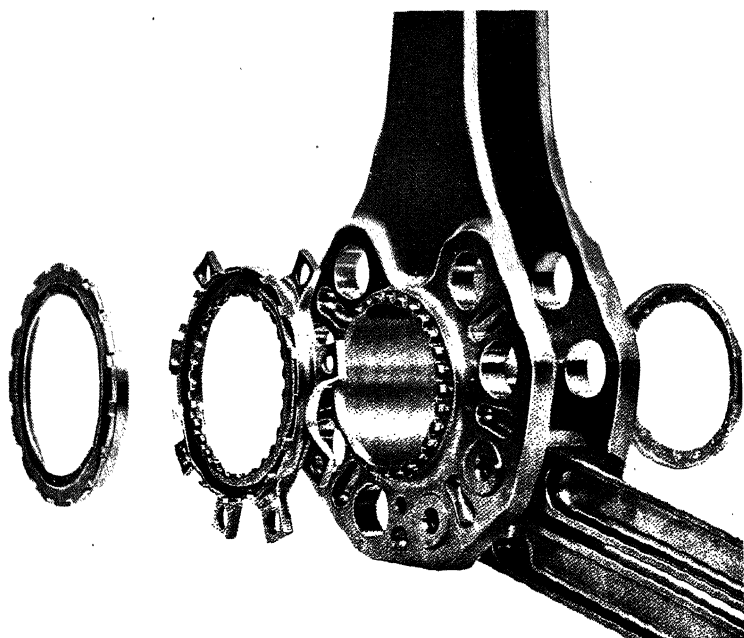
Wright "Cyclone" master rod and link rod arrangement.
